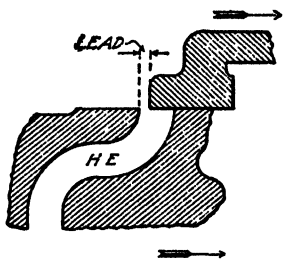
Section Showing Lead of Valve, Engine Running Over
